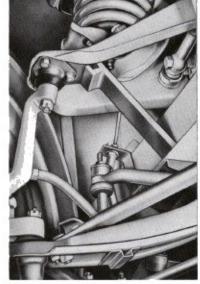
Locking Upper Ball Joint Stud in Spindle
